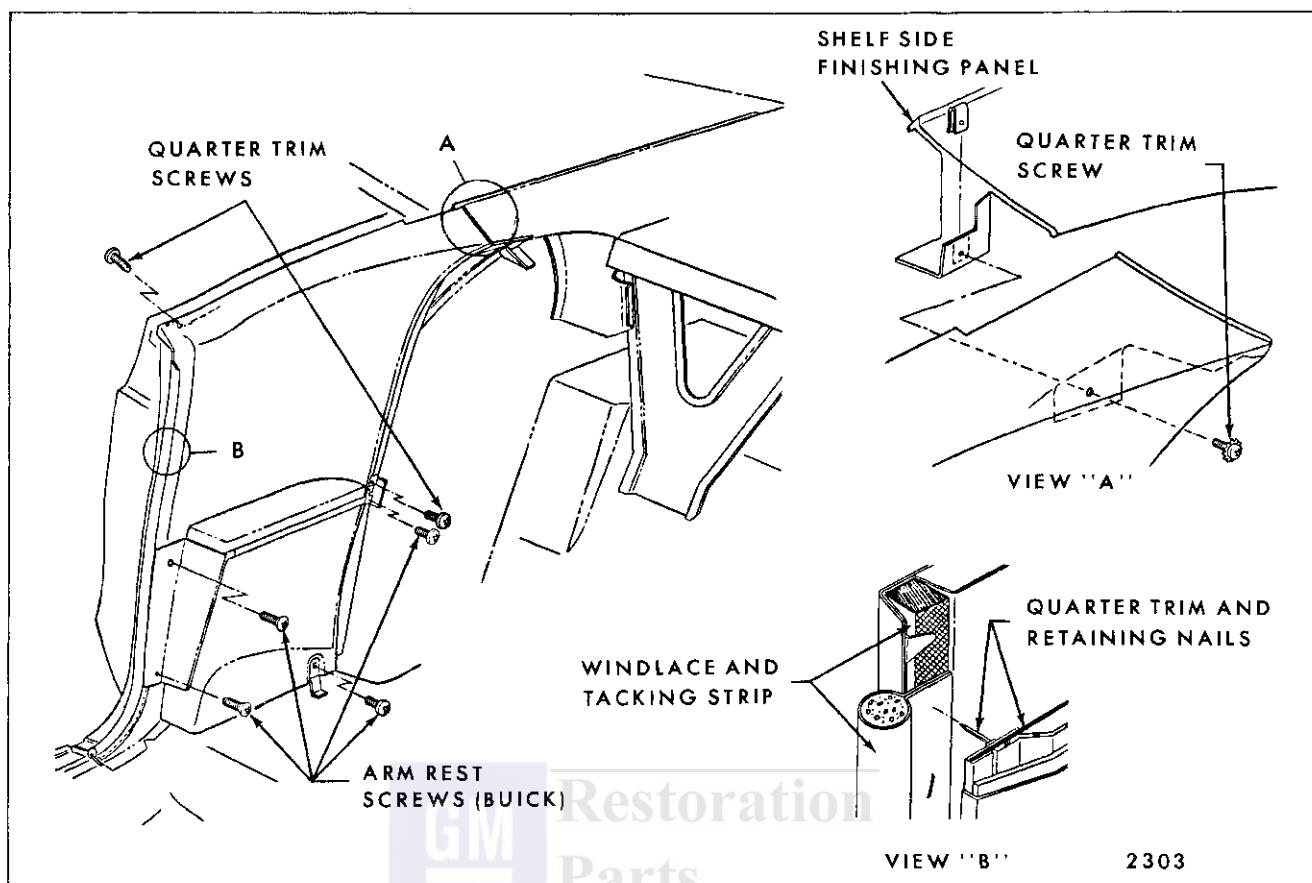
Rear Quarter Arm Rest and Trim Assembly - "E" Styles
